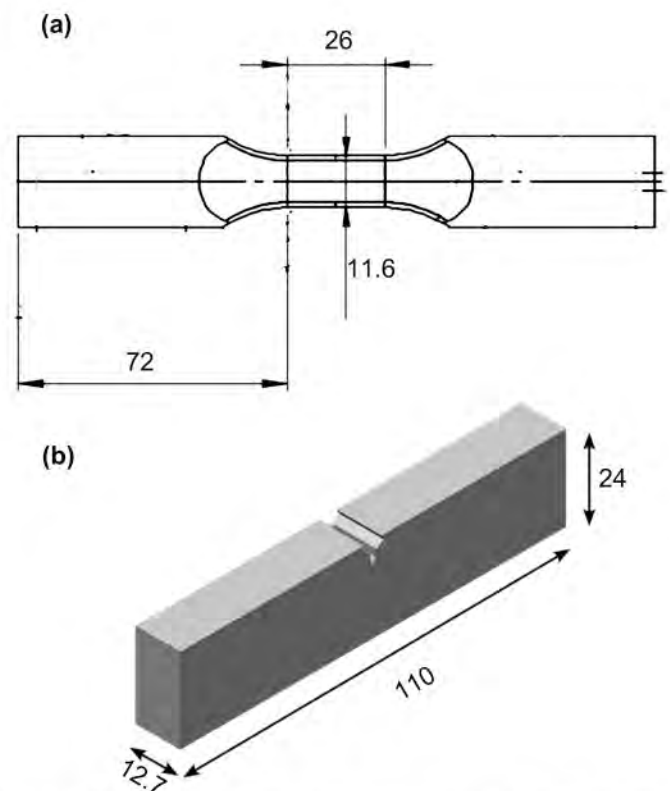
Fatigue specimen: a) axial fatigue specimen, b) SEB specimen for stress intensity threshold test. All dimensions are in mm.
